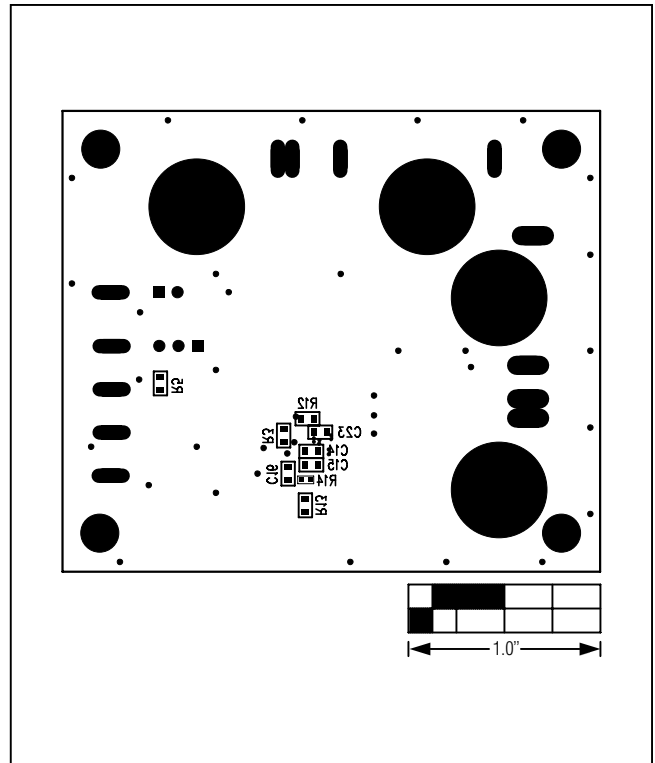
MAX15112 EV Kit Component Placement Guide—Solder Side
